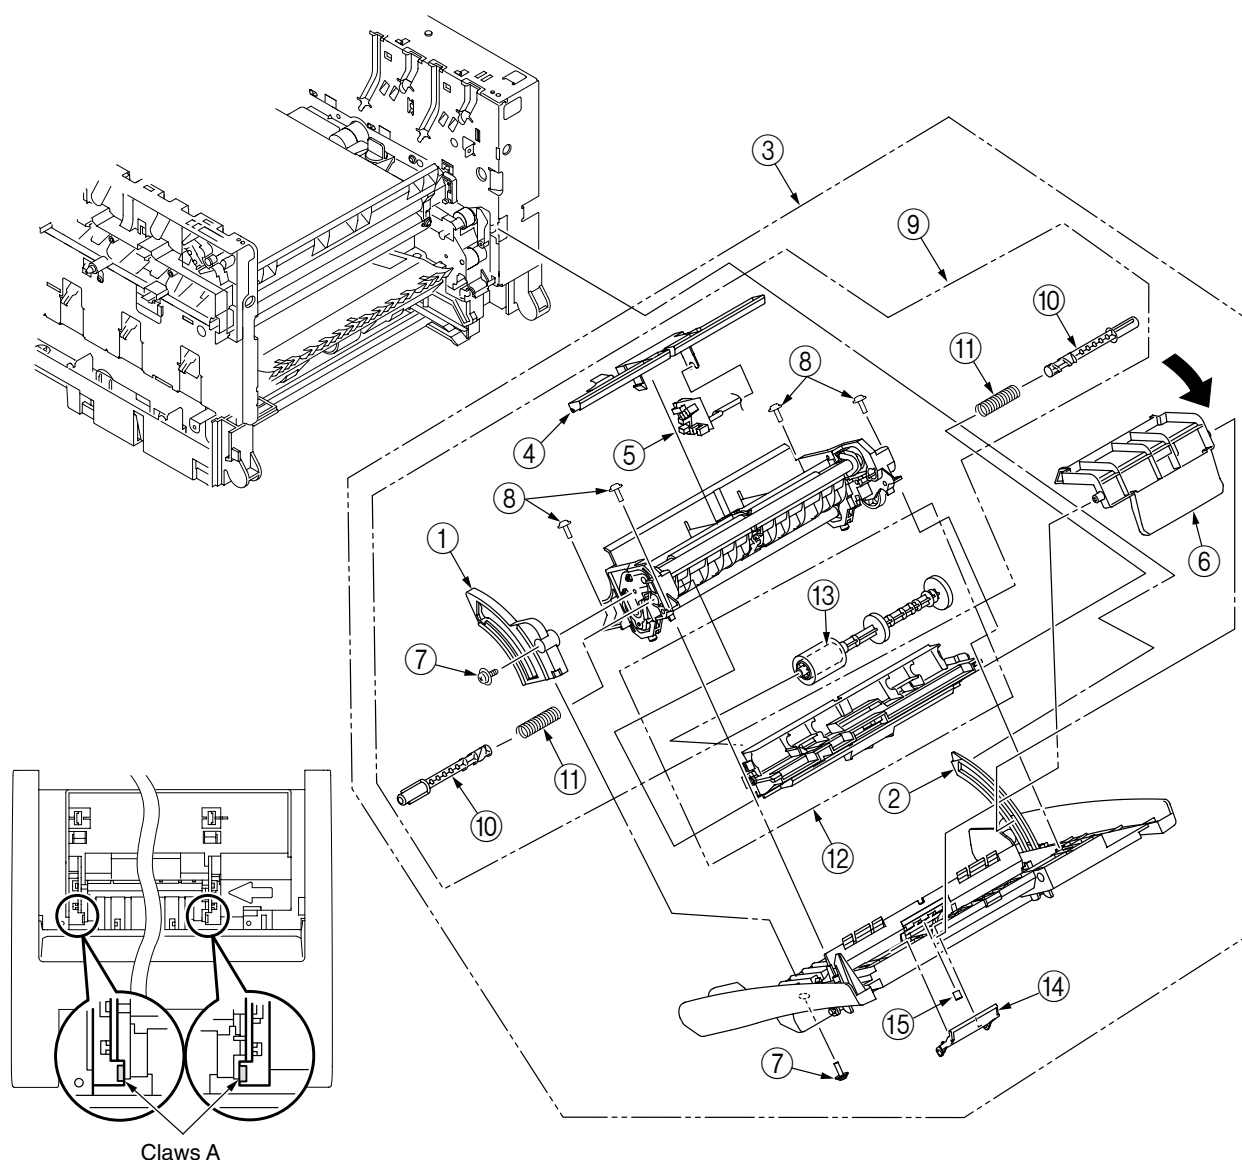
Feeder Unit / Board-RSF / MPT Hopping Roller / MPT Frame Separator / Cover-Front
